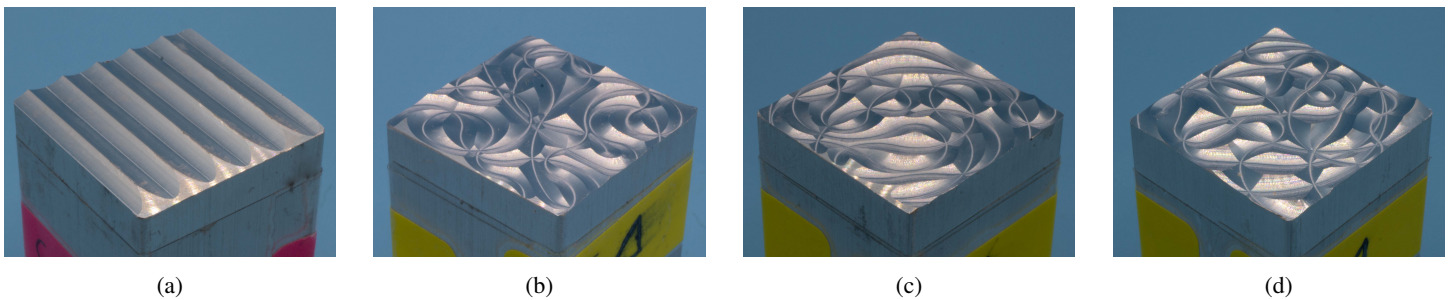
MACHINED WORKPIECE: (A) CONVENTIONAL TOOLPATH; (B) STOCHASTIC TOOLPATH (RADII 2.54 TO 10.16 MM); (C) STOCHASTIC TOOLPATH (RADII 5.08 TO 12.70 MM); (D) STOCHASTIC TOOLPATH (RADII 7.62 TO 15.24 MM)
